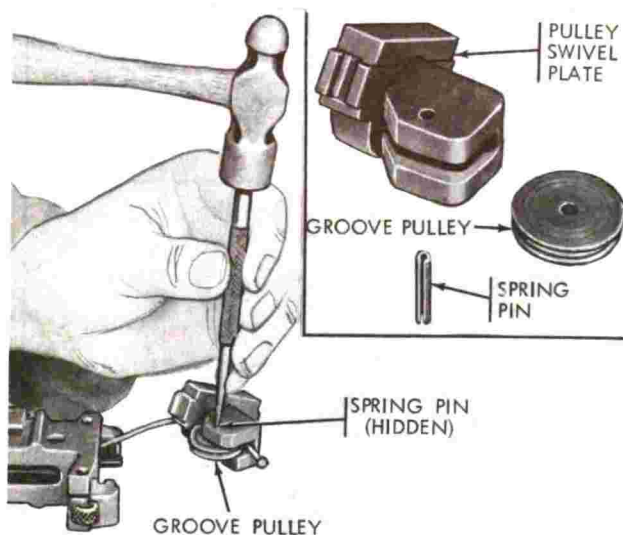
Disassembly/assembly of retractor slide assembly.
